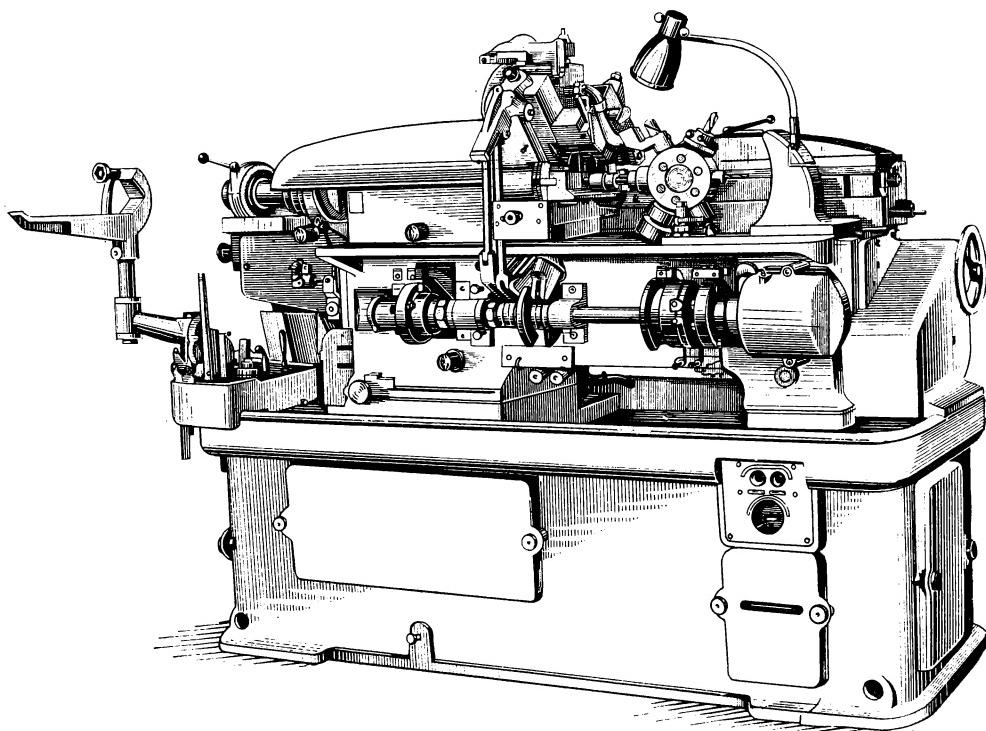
Model TR turret-type automatic screw machine (Manurhin, France)
